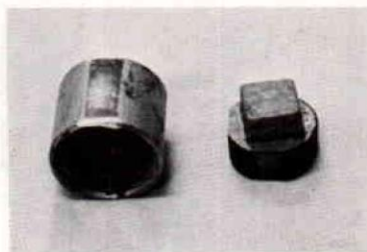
Improved tap and die showing flats and grooves needed for cutting threads.
